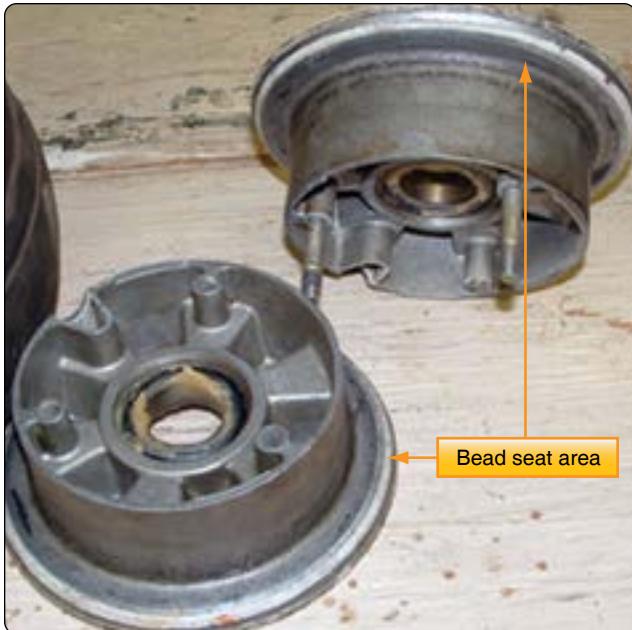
The bead seat areas of a light aircraft wheel set. Eddy current testing for cracks in the bead seat area is common.
